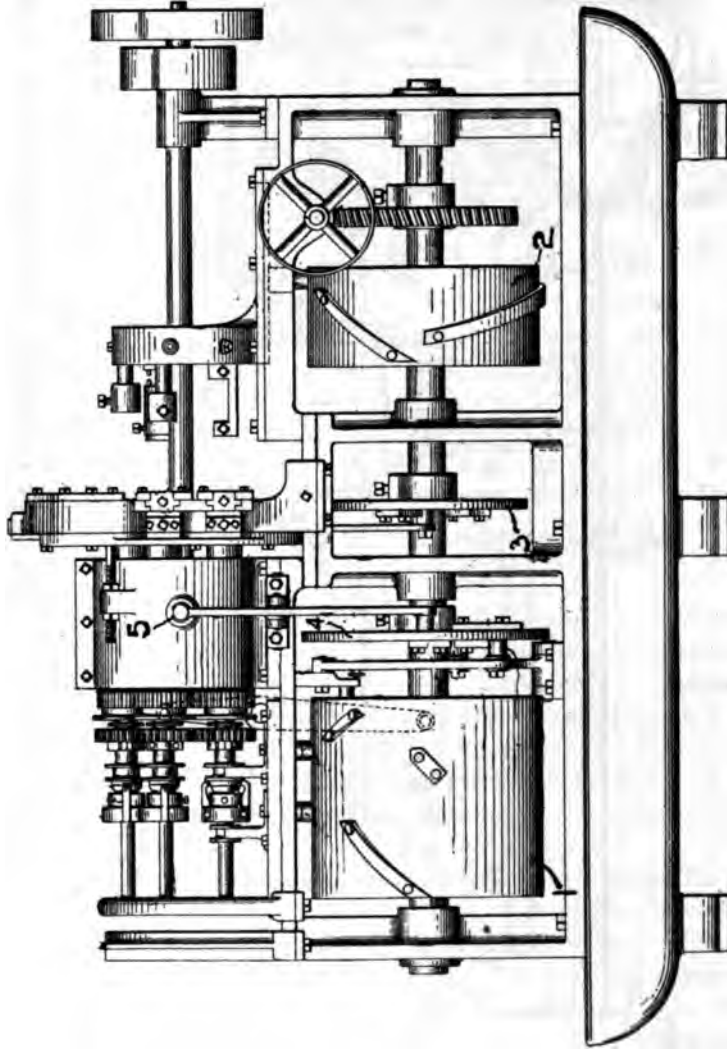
SPENCER TYPE MULTIPLE SPINDLE MACHINE SHOWING USE OF STRAP
